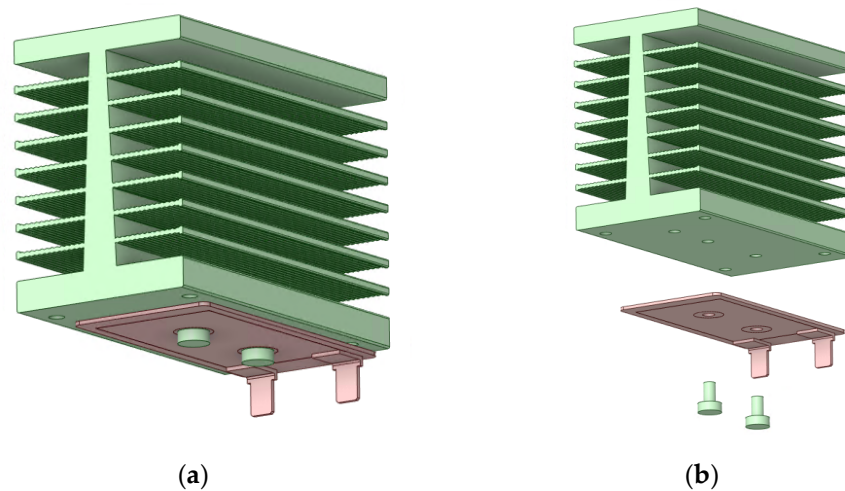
(a) Simulated geometry; (b) Exploded view of the simulated geometry.
